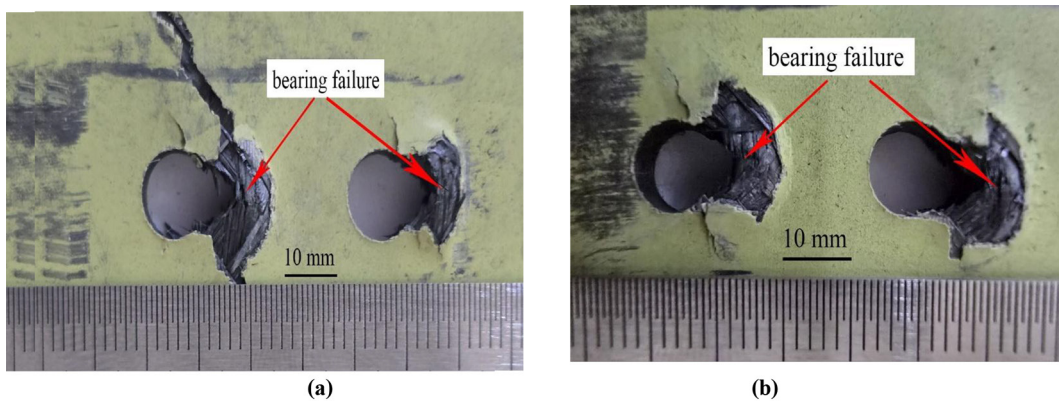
Bearing failure in CFRP: (a) for HSS, (b) for 4-flute solid carbide
